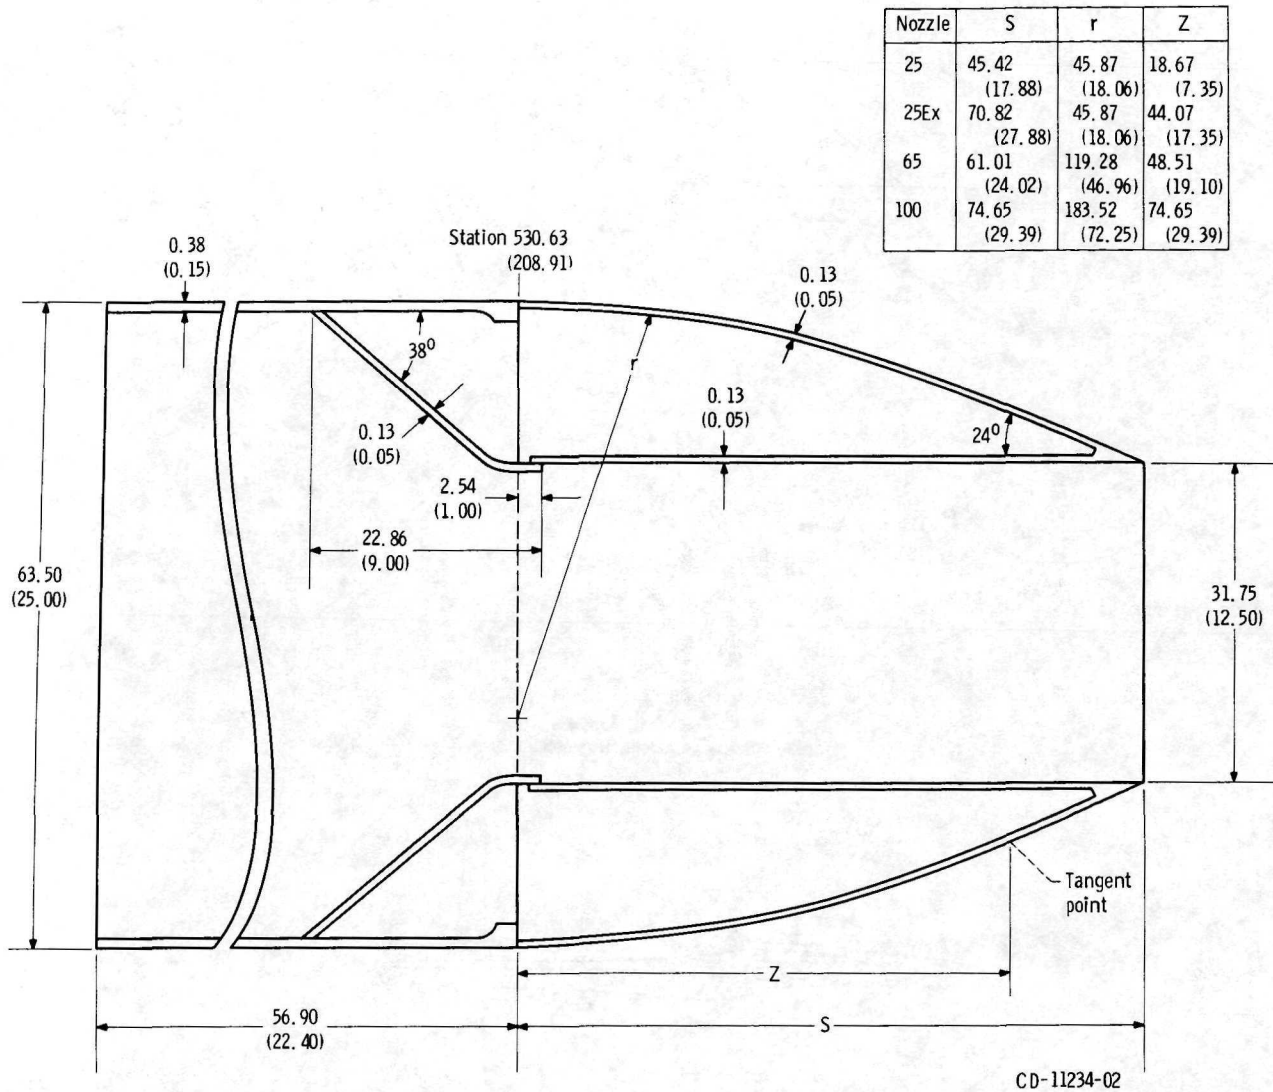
Boattail nozzle dimensions (all dimensions are in cm (in.)).
